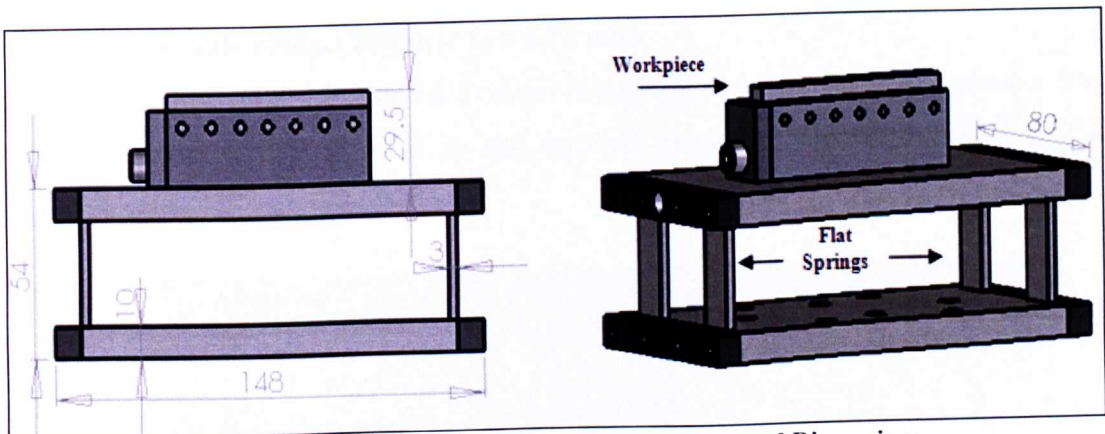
3: Table with Four Flat Springs-Design and Dimensions.
